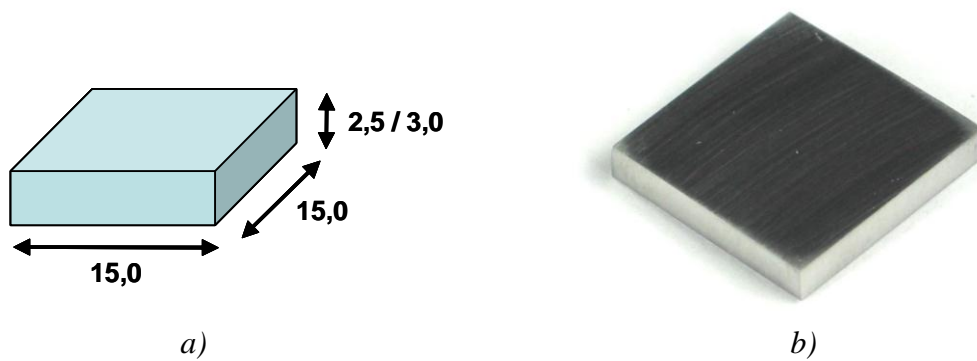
Test coupon: a) nominal dimensions; b) coupon before testing.
